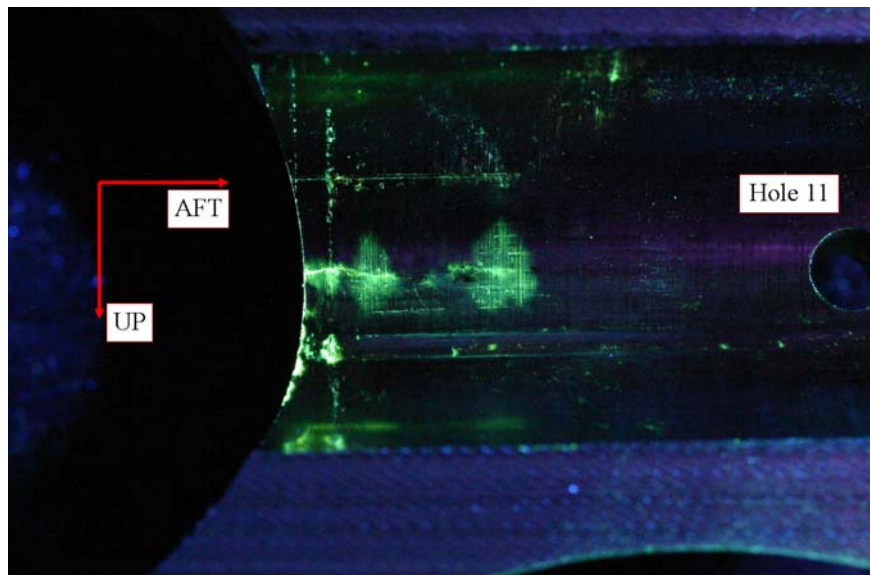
FPI Hole 4 Crack, Surface B (A/C N5274P)
